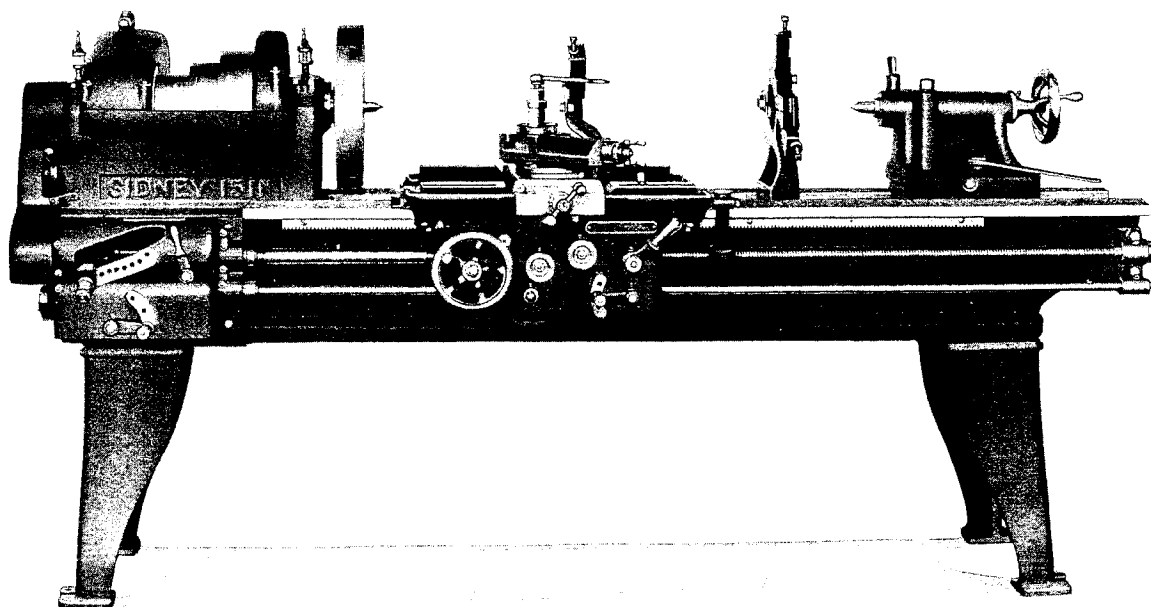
15" x 8' Sidney Heavy Pattern Quick Change Gear Engine Lathe.
